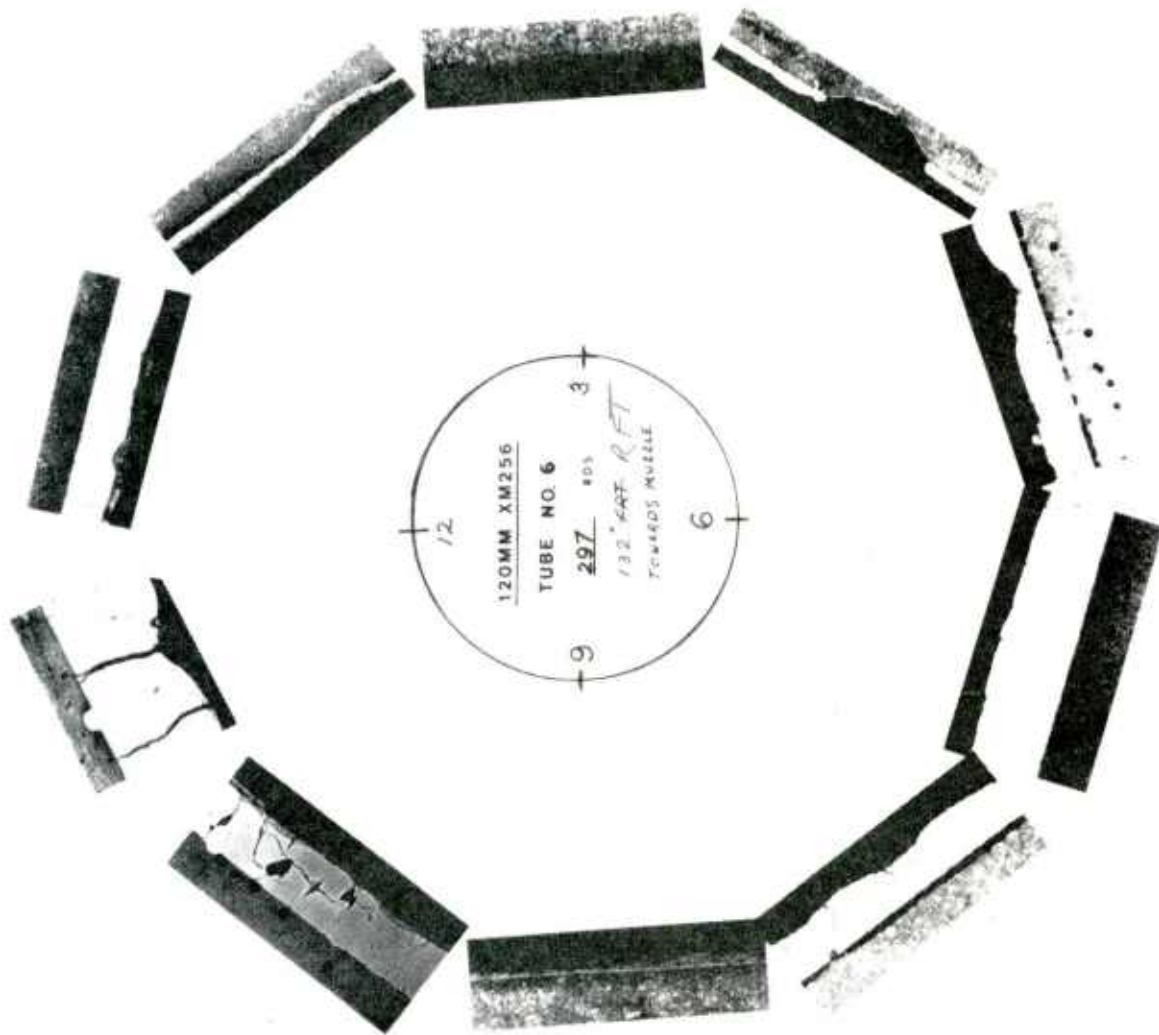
Bore Surface Cross-Sections of 120 mm M256 (Tube No. 6) at 132 in.
